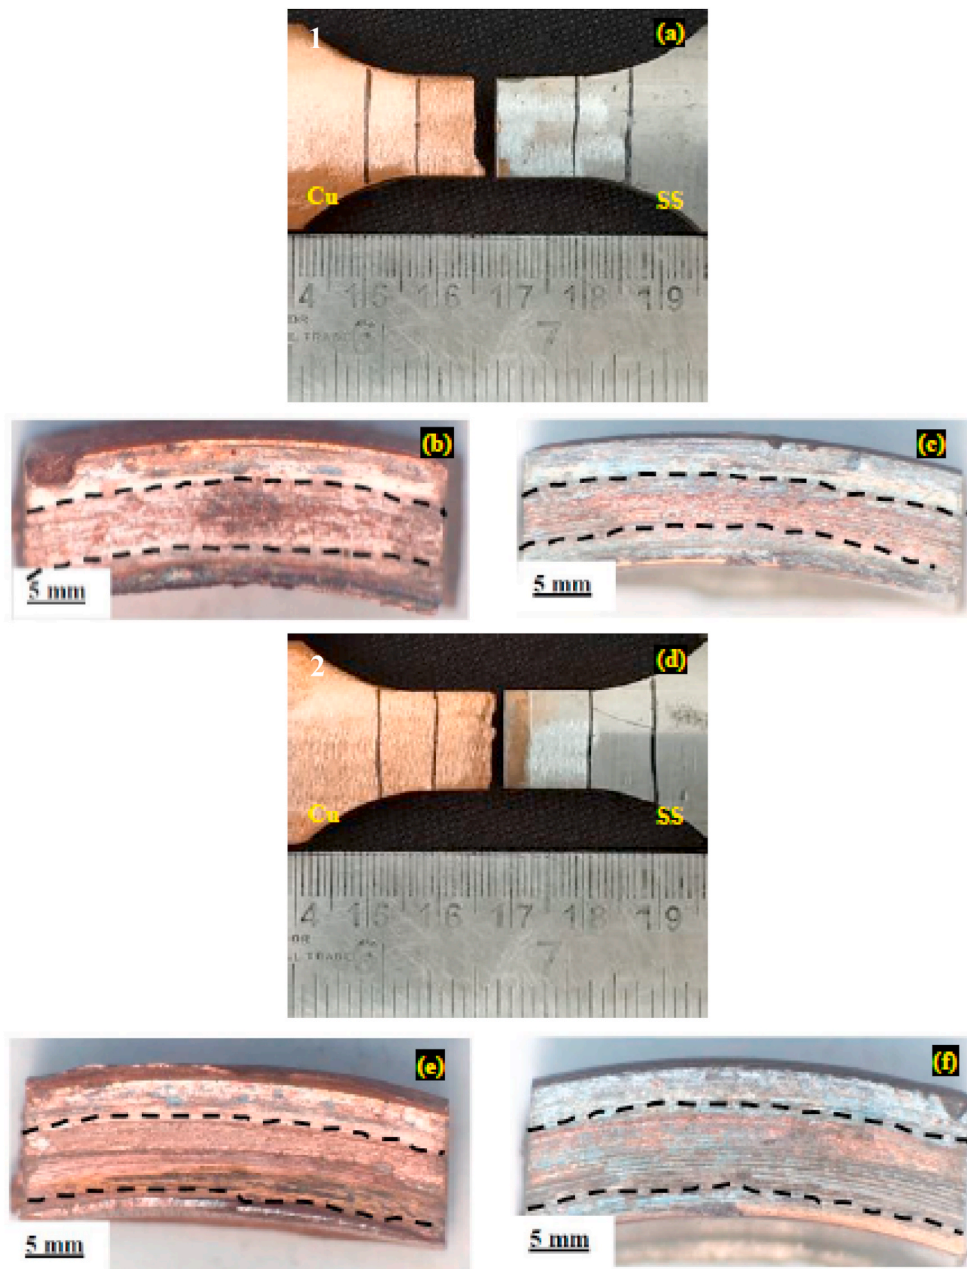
Fracture location after tensile testing and fracture surface images at a macroscopic level for weld made by friction time of 10 s. (a) broken tensile specimen (tensile specimen 1), (b) fractured surface of Cu side for broken specimen shown in (a), (c) fractured surface of SS side for broken specimen shown in (a), (d) broken tensile specimen (tensile specimen 2), (e) fractured surface of Cu side for broken specimen shown in (d), (f) fractured surface of SS side for broken specimen shown in (d).
